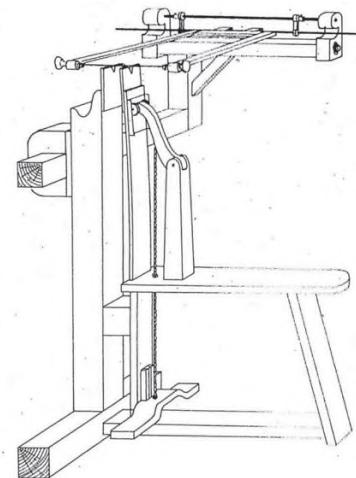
Veneer cutting board Figure 7. Fretsaw, hand-held cutting saw
